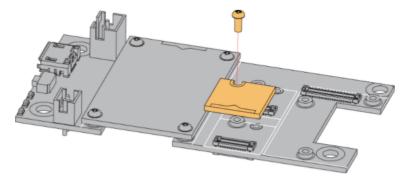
RAK12014 WisBlock ToF Sensor Module Mounting
